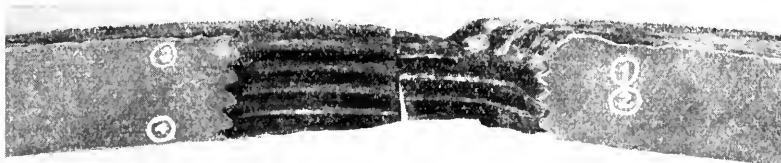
CROSS-SECTION OF FIG. 6 OUTLINED BY WHITE MARK. BOLT REMOVED AND EXTENT OF CORROSION OF CRACKS SHOWN. CIRCLES INDICATE AREAS WHERE CORRESPONDING MICROPHOTOGRAPHS TAKEN
